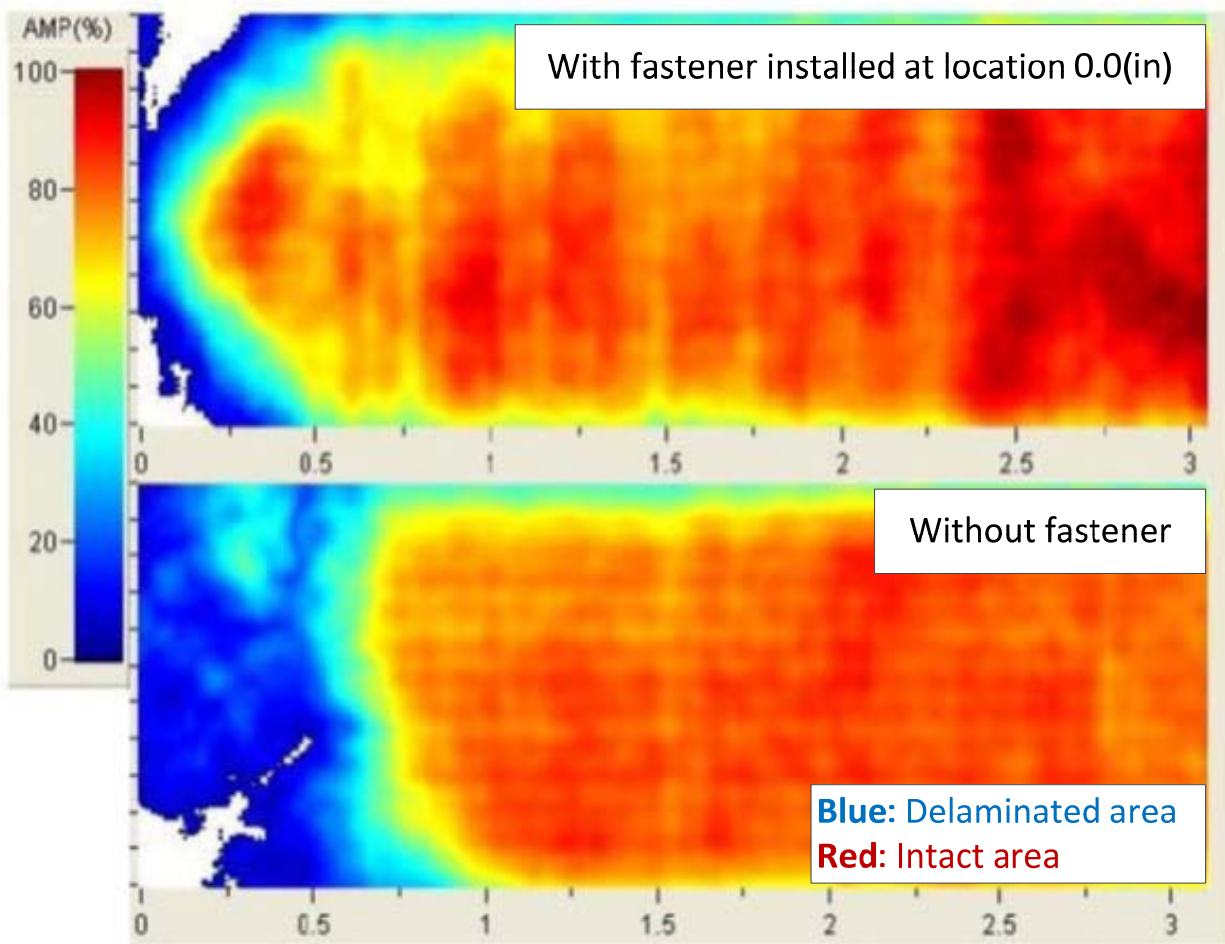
C-Scan Example of Crack Front Geometries with and without a Crack Arrest Fastener
